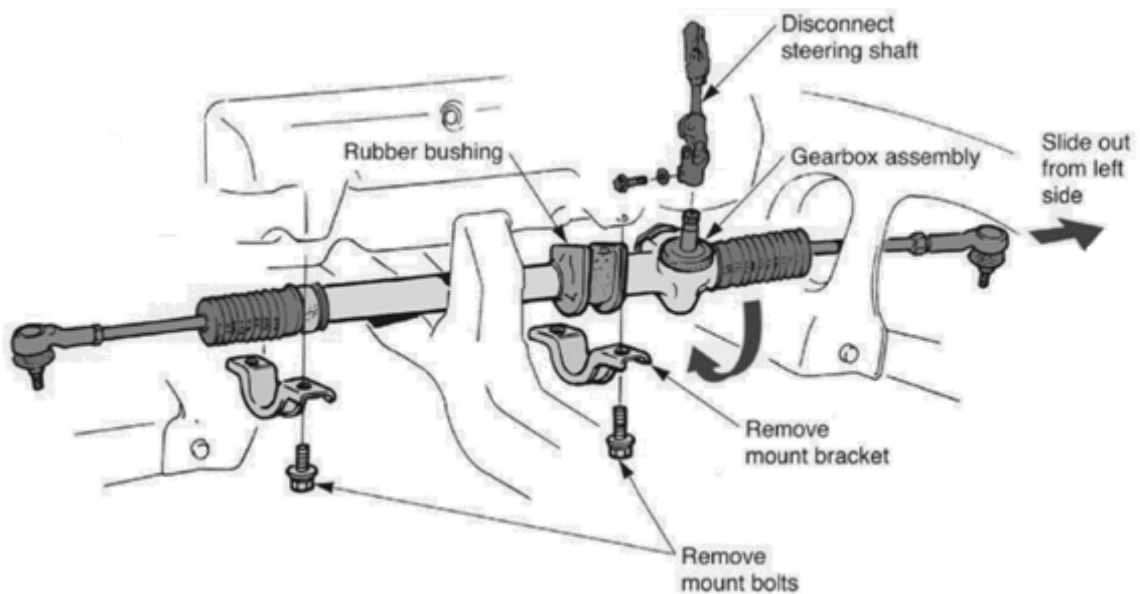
Manual Rack and Pinion Gearbox removal
